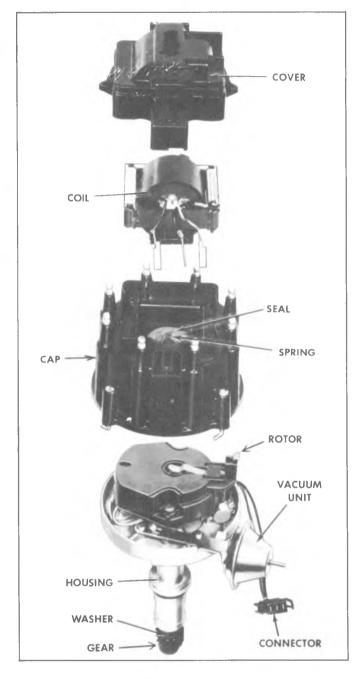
D-10i--Exploded View of 8 Cylinder HEI Distributor
